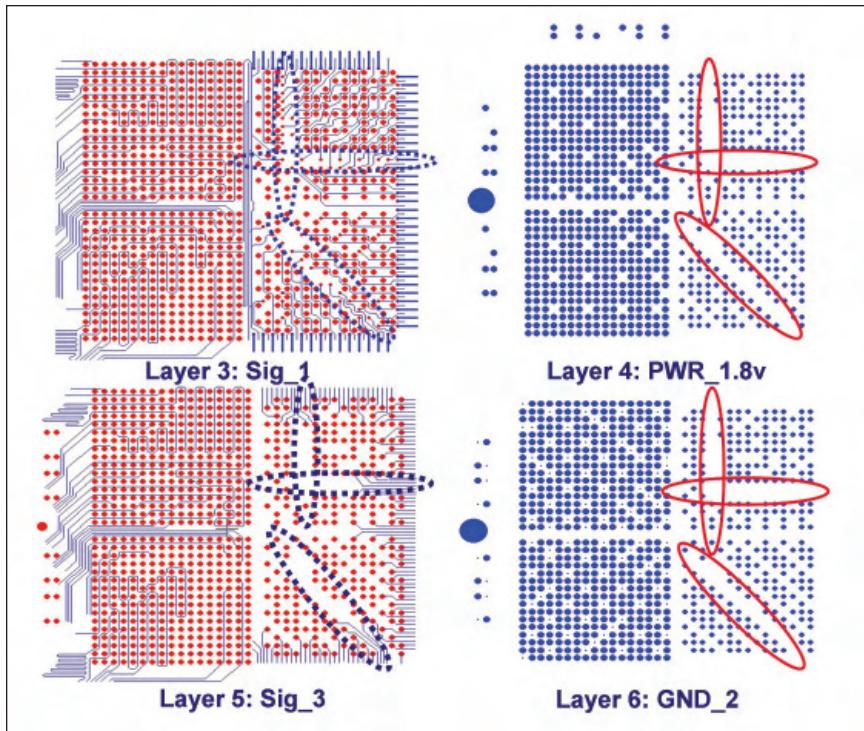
This shows layers 3 to 6 of this multilayer. The right-side panels show the escapes opened up by the boulevards.
